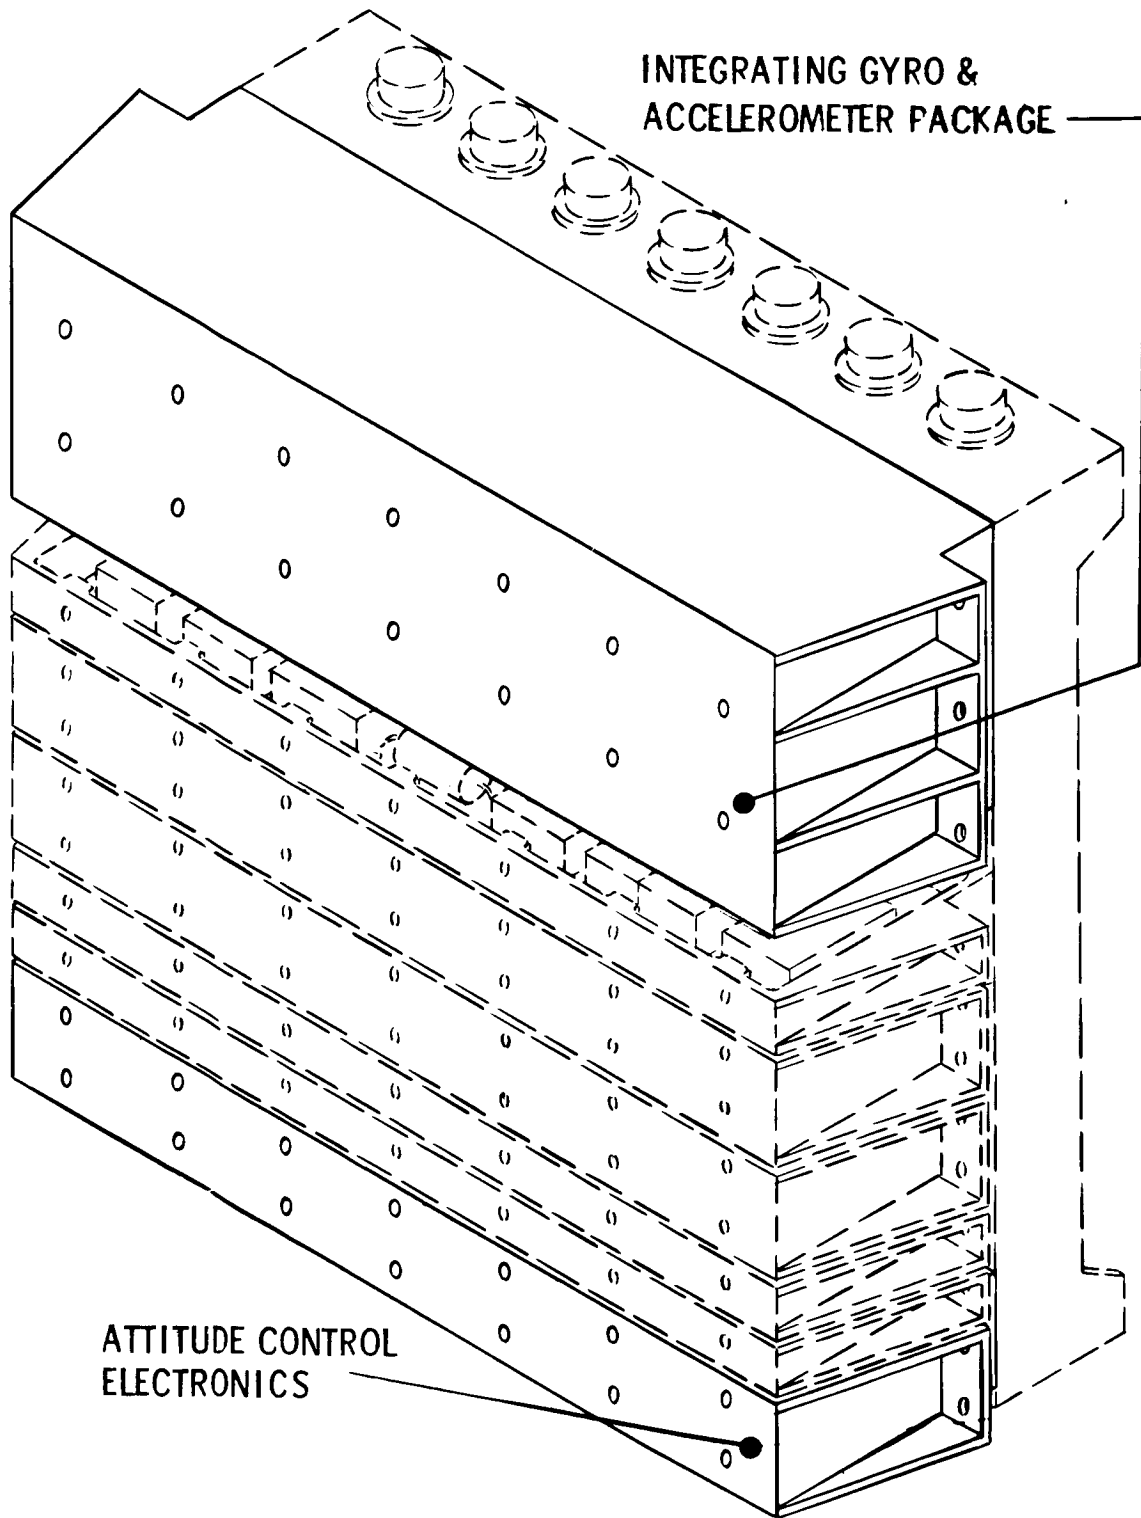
Isometric View - Guidance and Control Electronics Assembly, Bay X111
